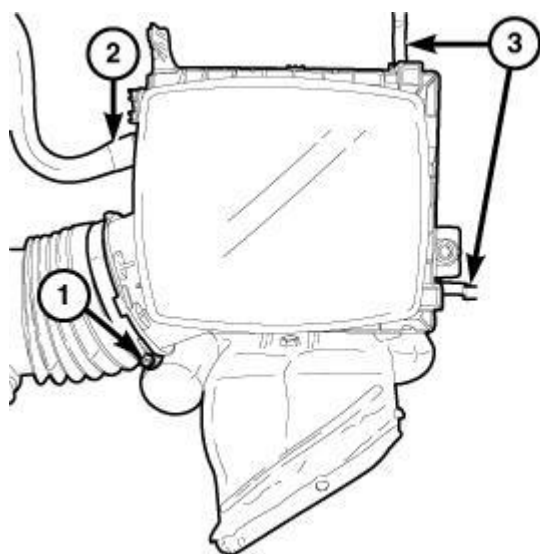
Hose Clamp, Make Up Air Hose & Spring Clips
